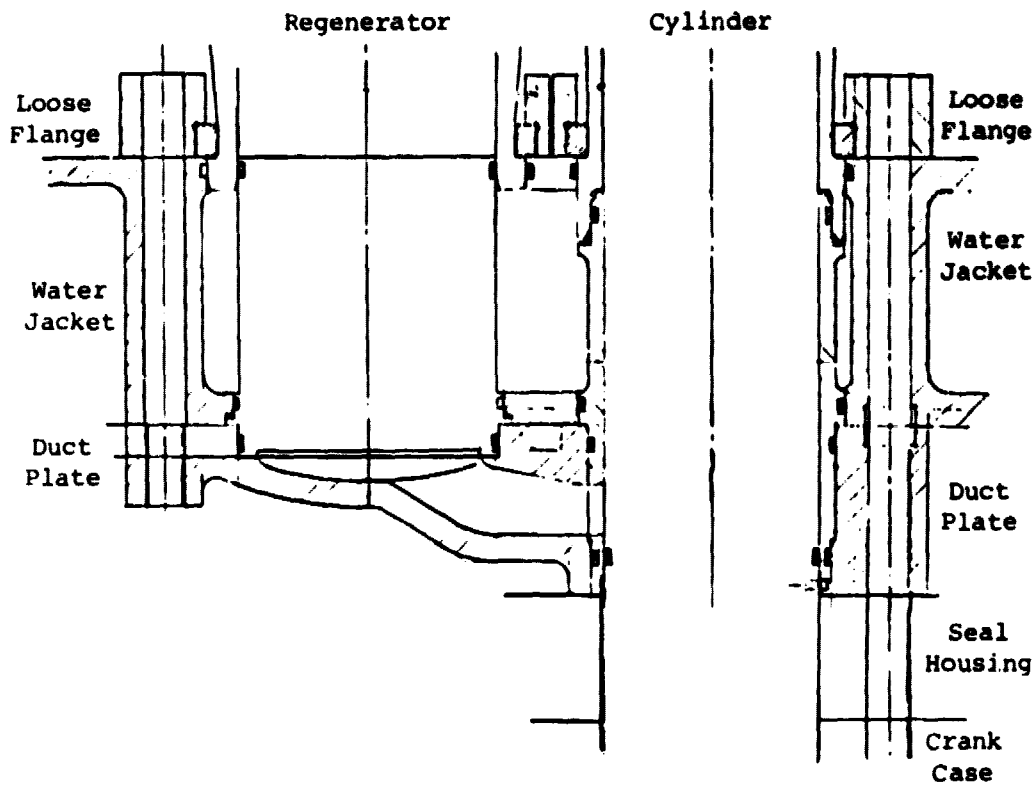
22 Schematic Picture of the Bolt Arrangement of the Heater Head
